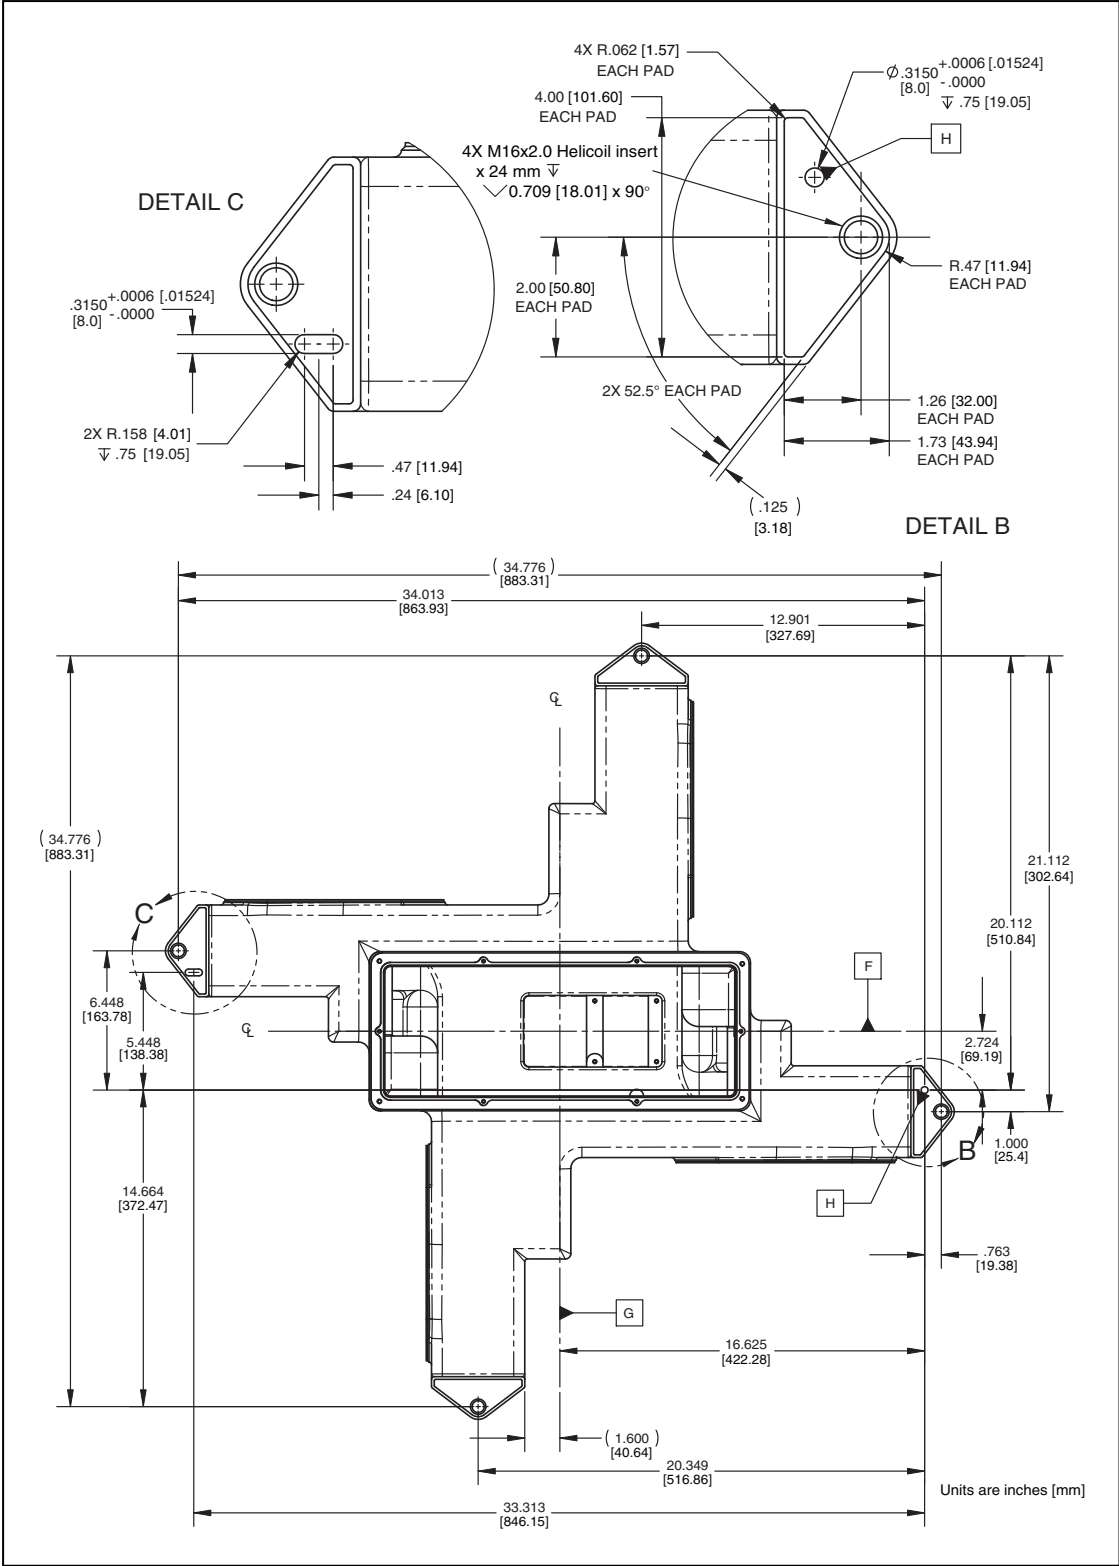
Mounting Hole Dimensions, iX4-650HS/800HS Robots
